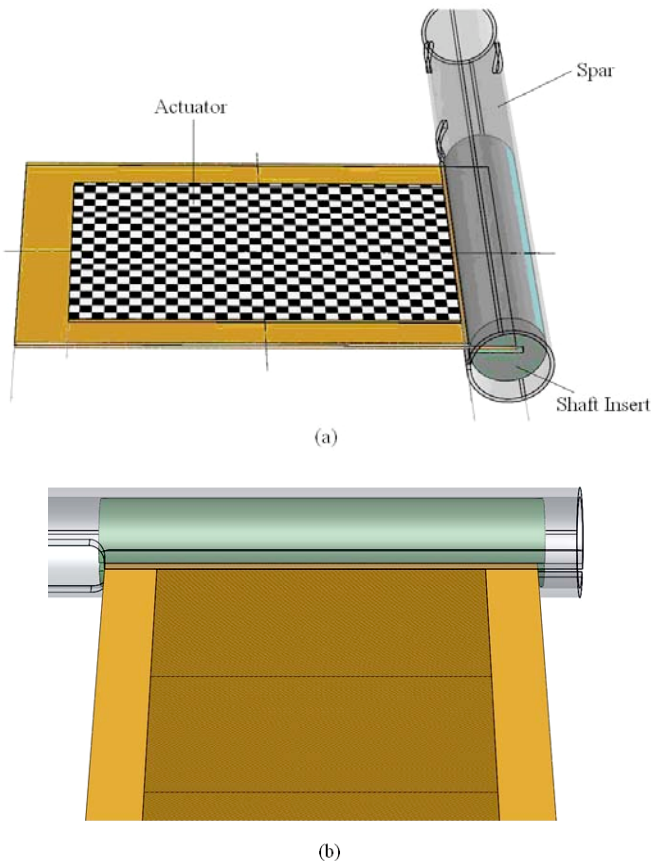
a) Overall Assembly Drawing, b) Drawing of Actuator and Shaft Insert Placement.
